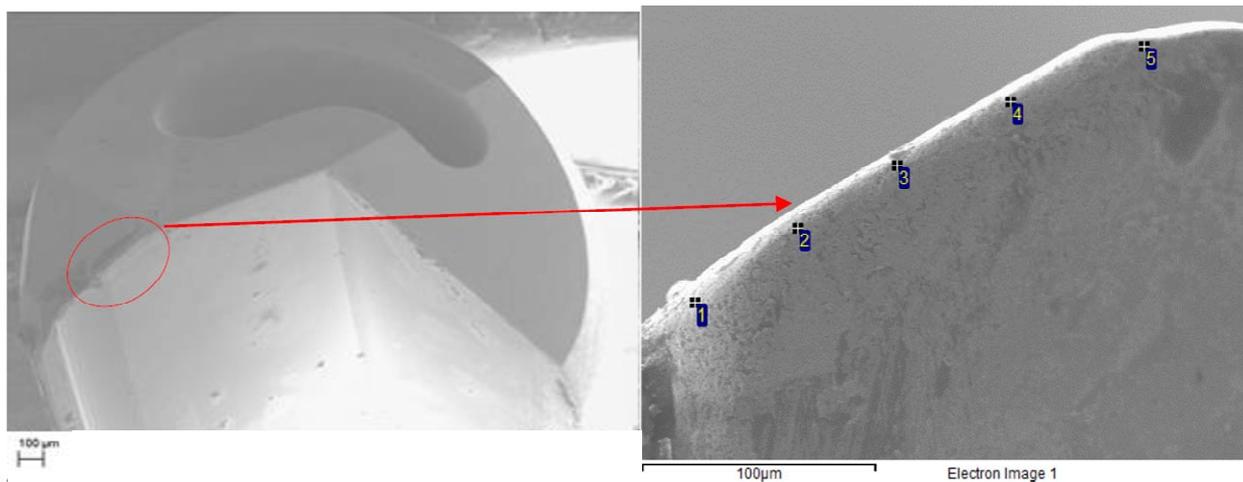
Automatic honed tool after drilling 50 holes (a), detailed view (b).
